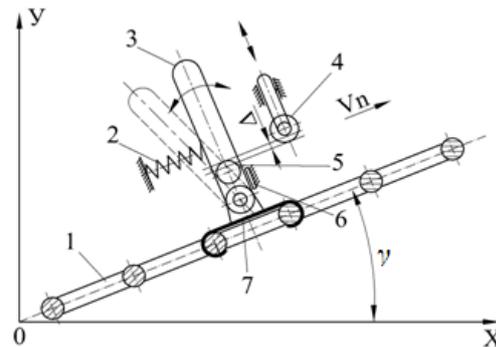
Design and Flow Sheet of a Conveyor-Cleaner
